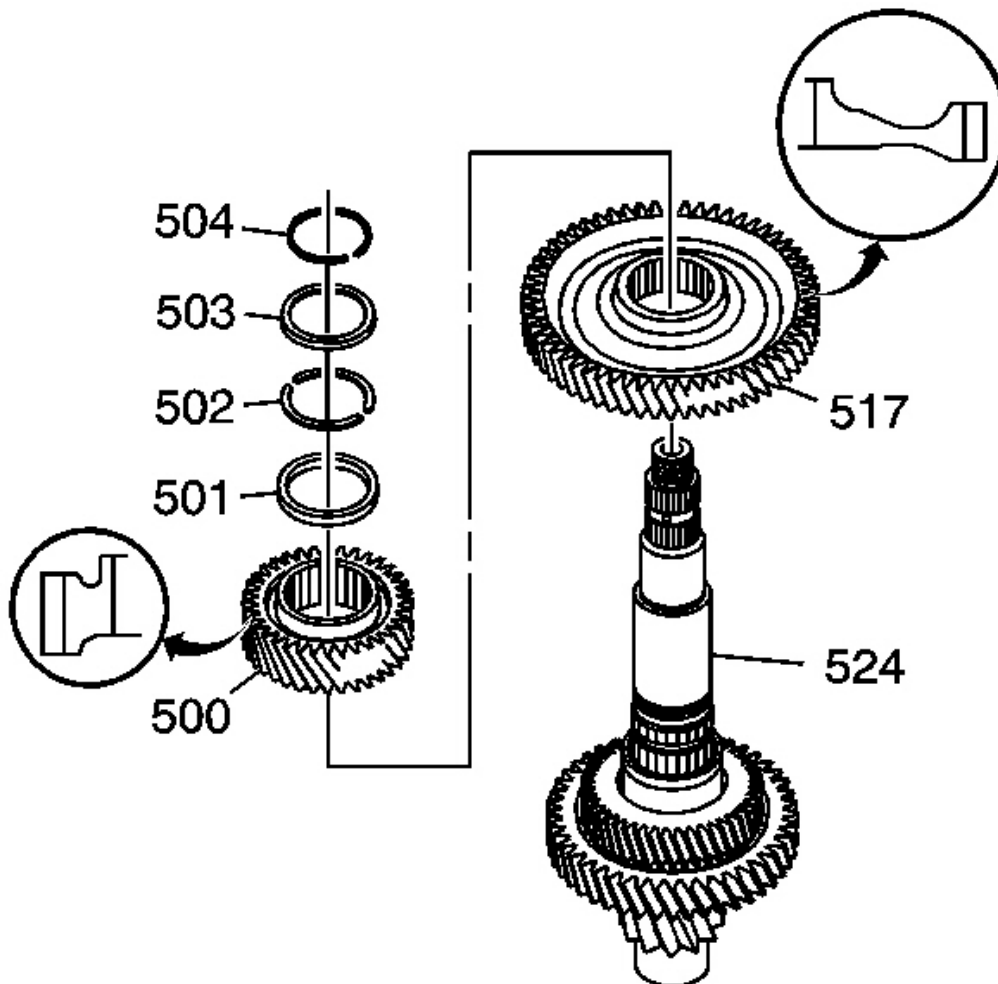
3rd/4th Driven Gear Output Shaft & Components Removed
